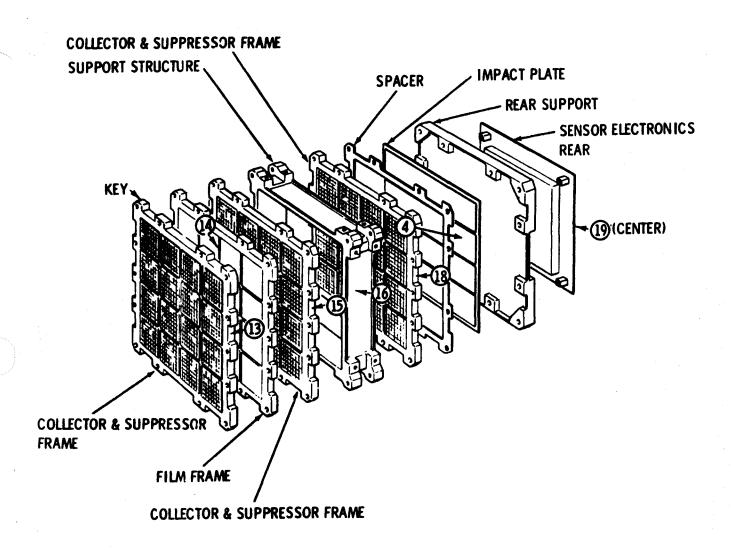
Exploded View of Dual Sensor (T/C Locations East Sensor)
